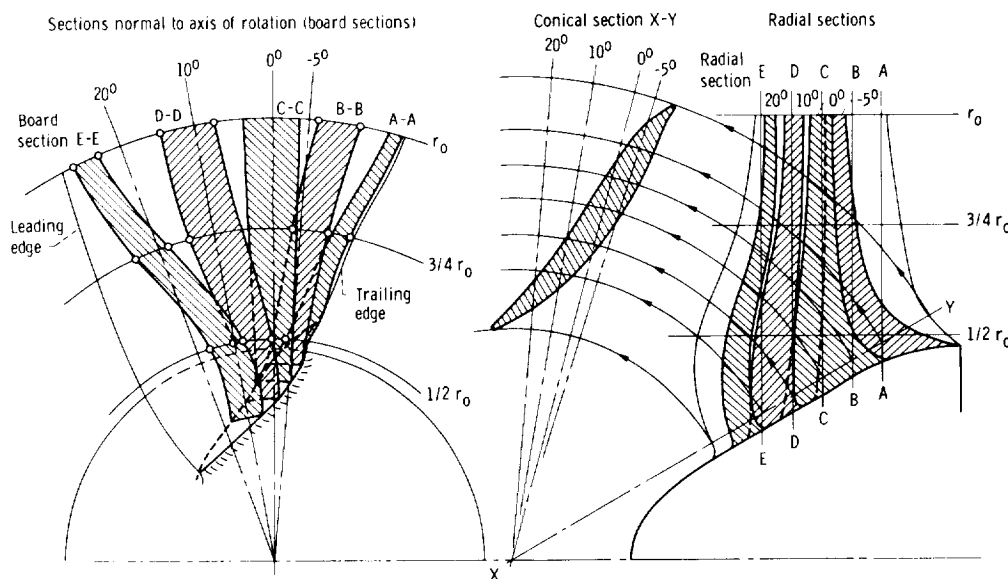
Three-dimensional layout of axial-flow pump rotor.
